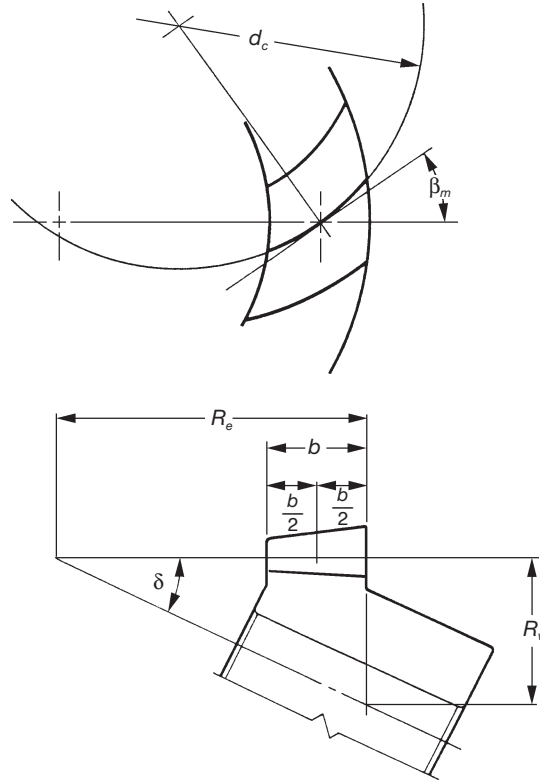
Spiral Bevel Gear (Left-Hand)
